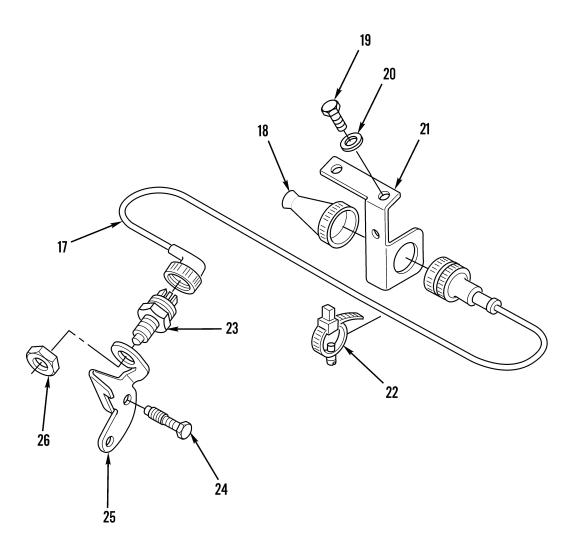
Wiring Harness and Sensors (Sheet 3 of 3)
